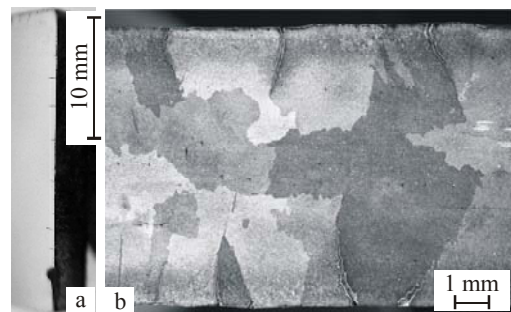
Thermal fatigue cracks on the specimen edge [4]:
